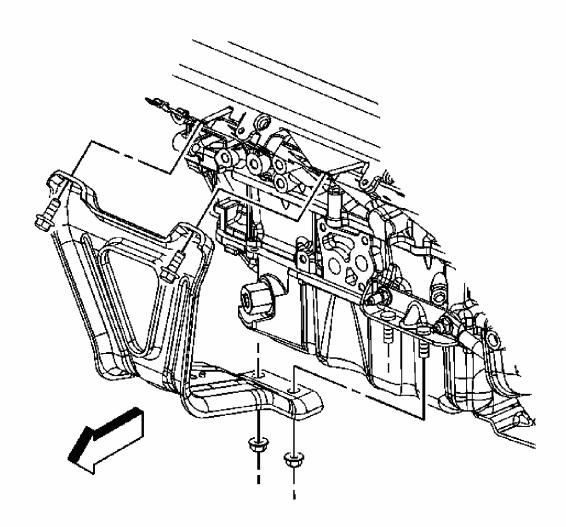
Identifying Front Engine Mount Bracket Bolts/Nuts Courtesy of GENERAL MOTORS CORP.
